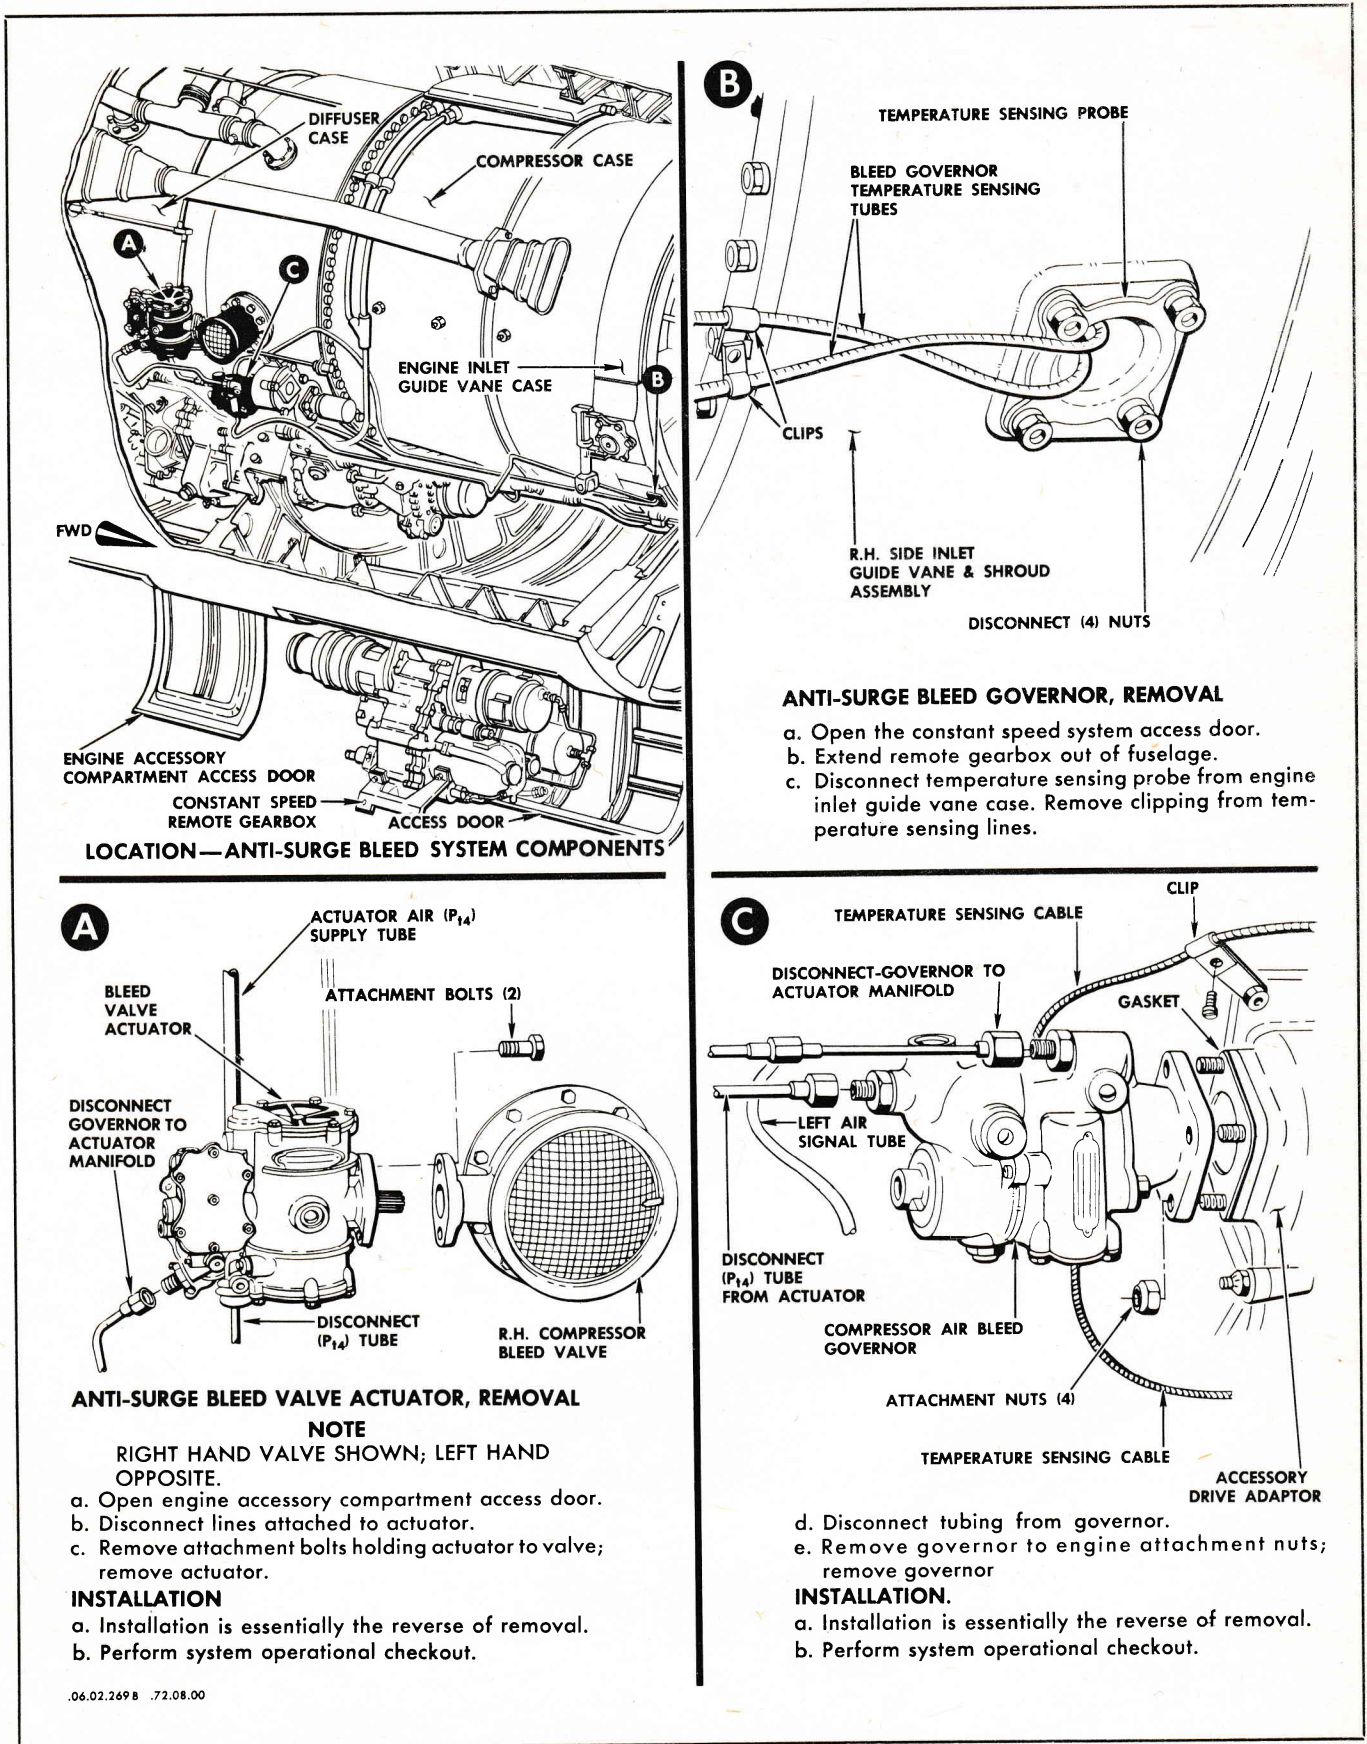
Replacement, Anti-Surge Bleed System Components
